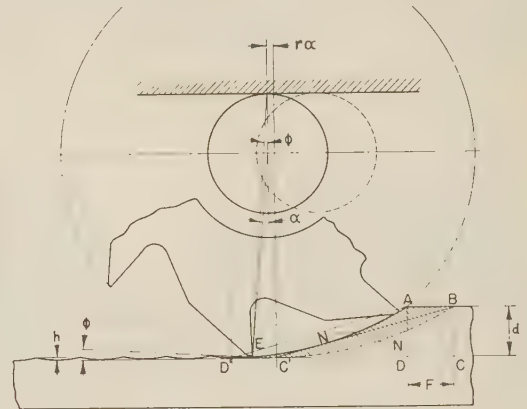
ANGLE OF APPROACH OF A MILLING-CUTTER TOOTH
